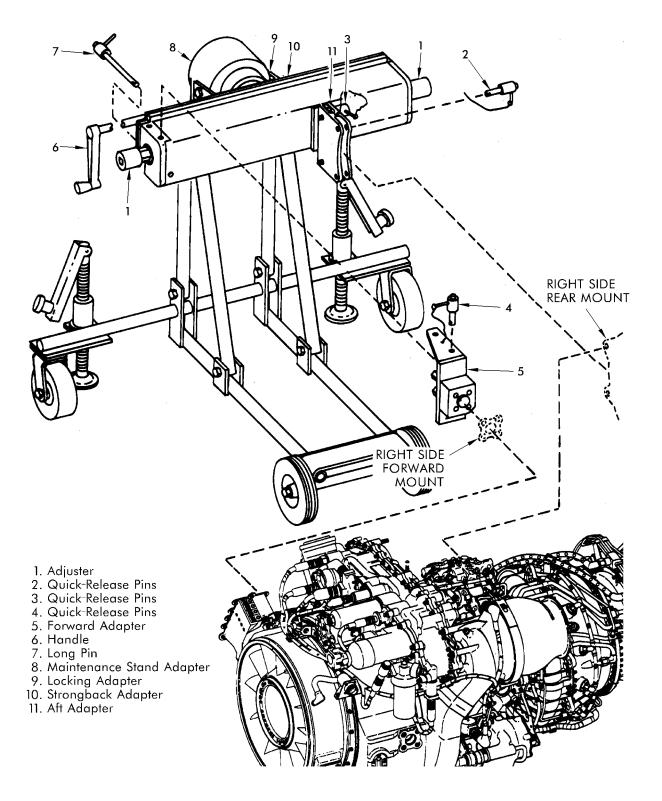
Maintenance Stand Adapter 21C7071G01; Removal and Installation of Engine or Cold Section Module
